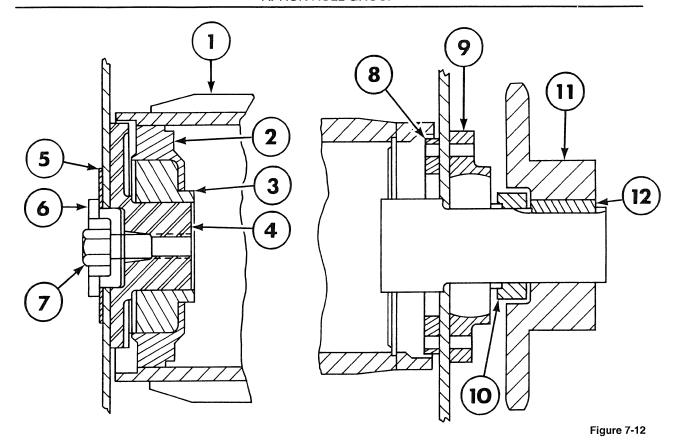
shows the component breakdown of the drive roll assembly in the Model 644.
